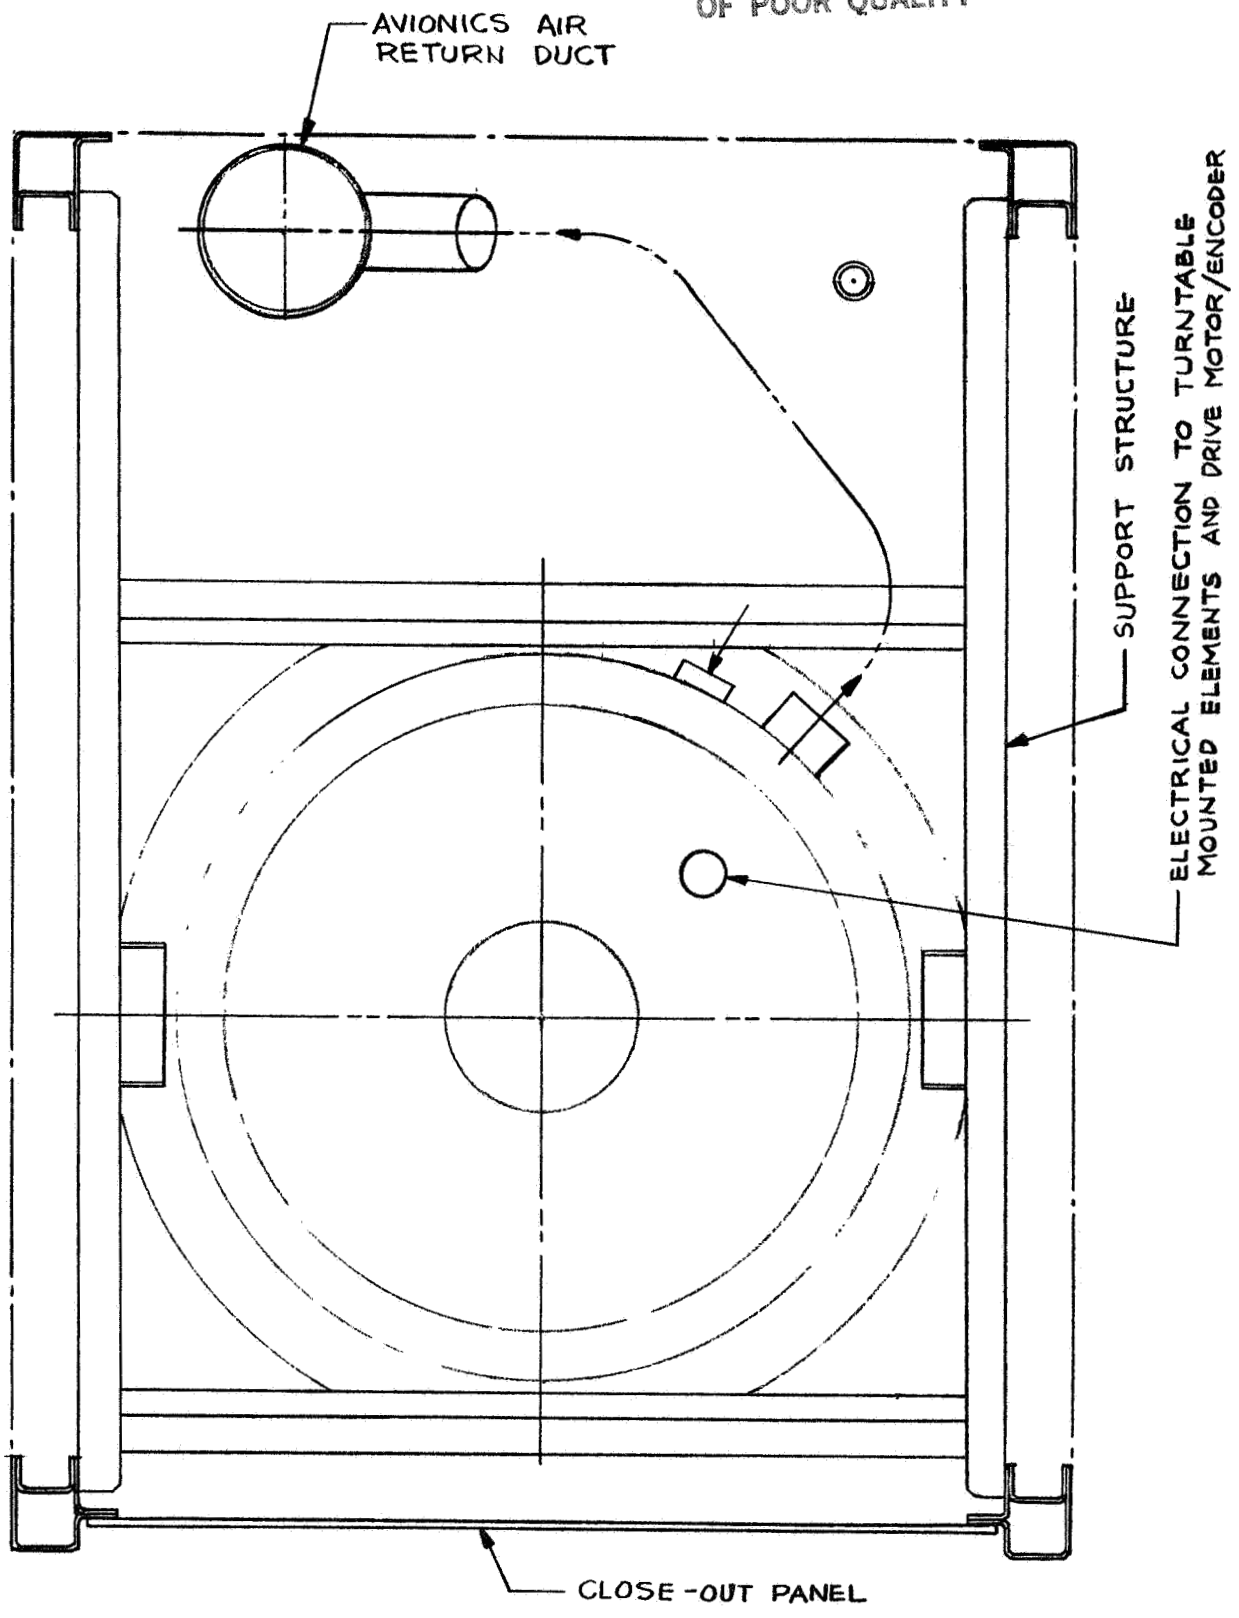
(c) SECTION B-B (MECHANICAL ASSEMBLY INSTALLATION)
